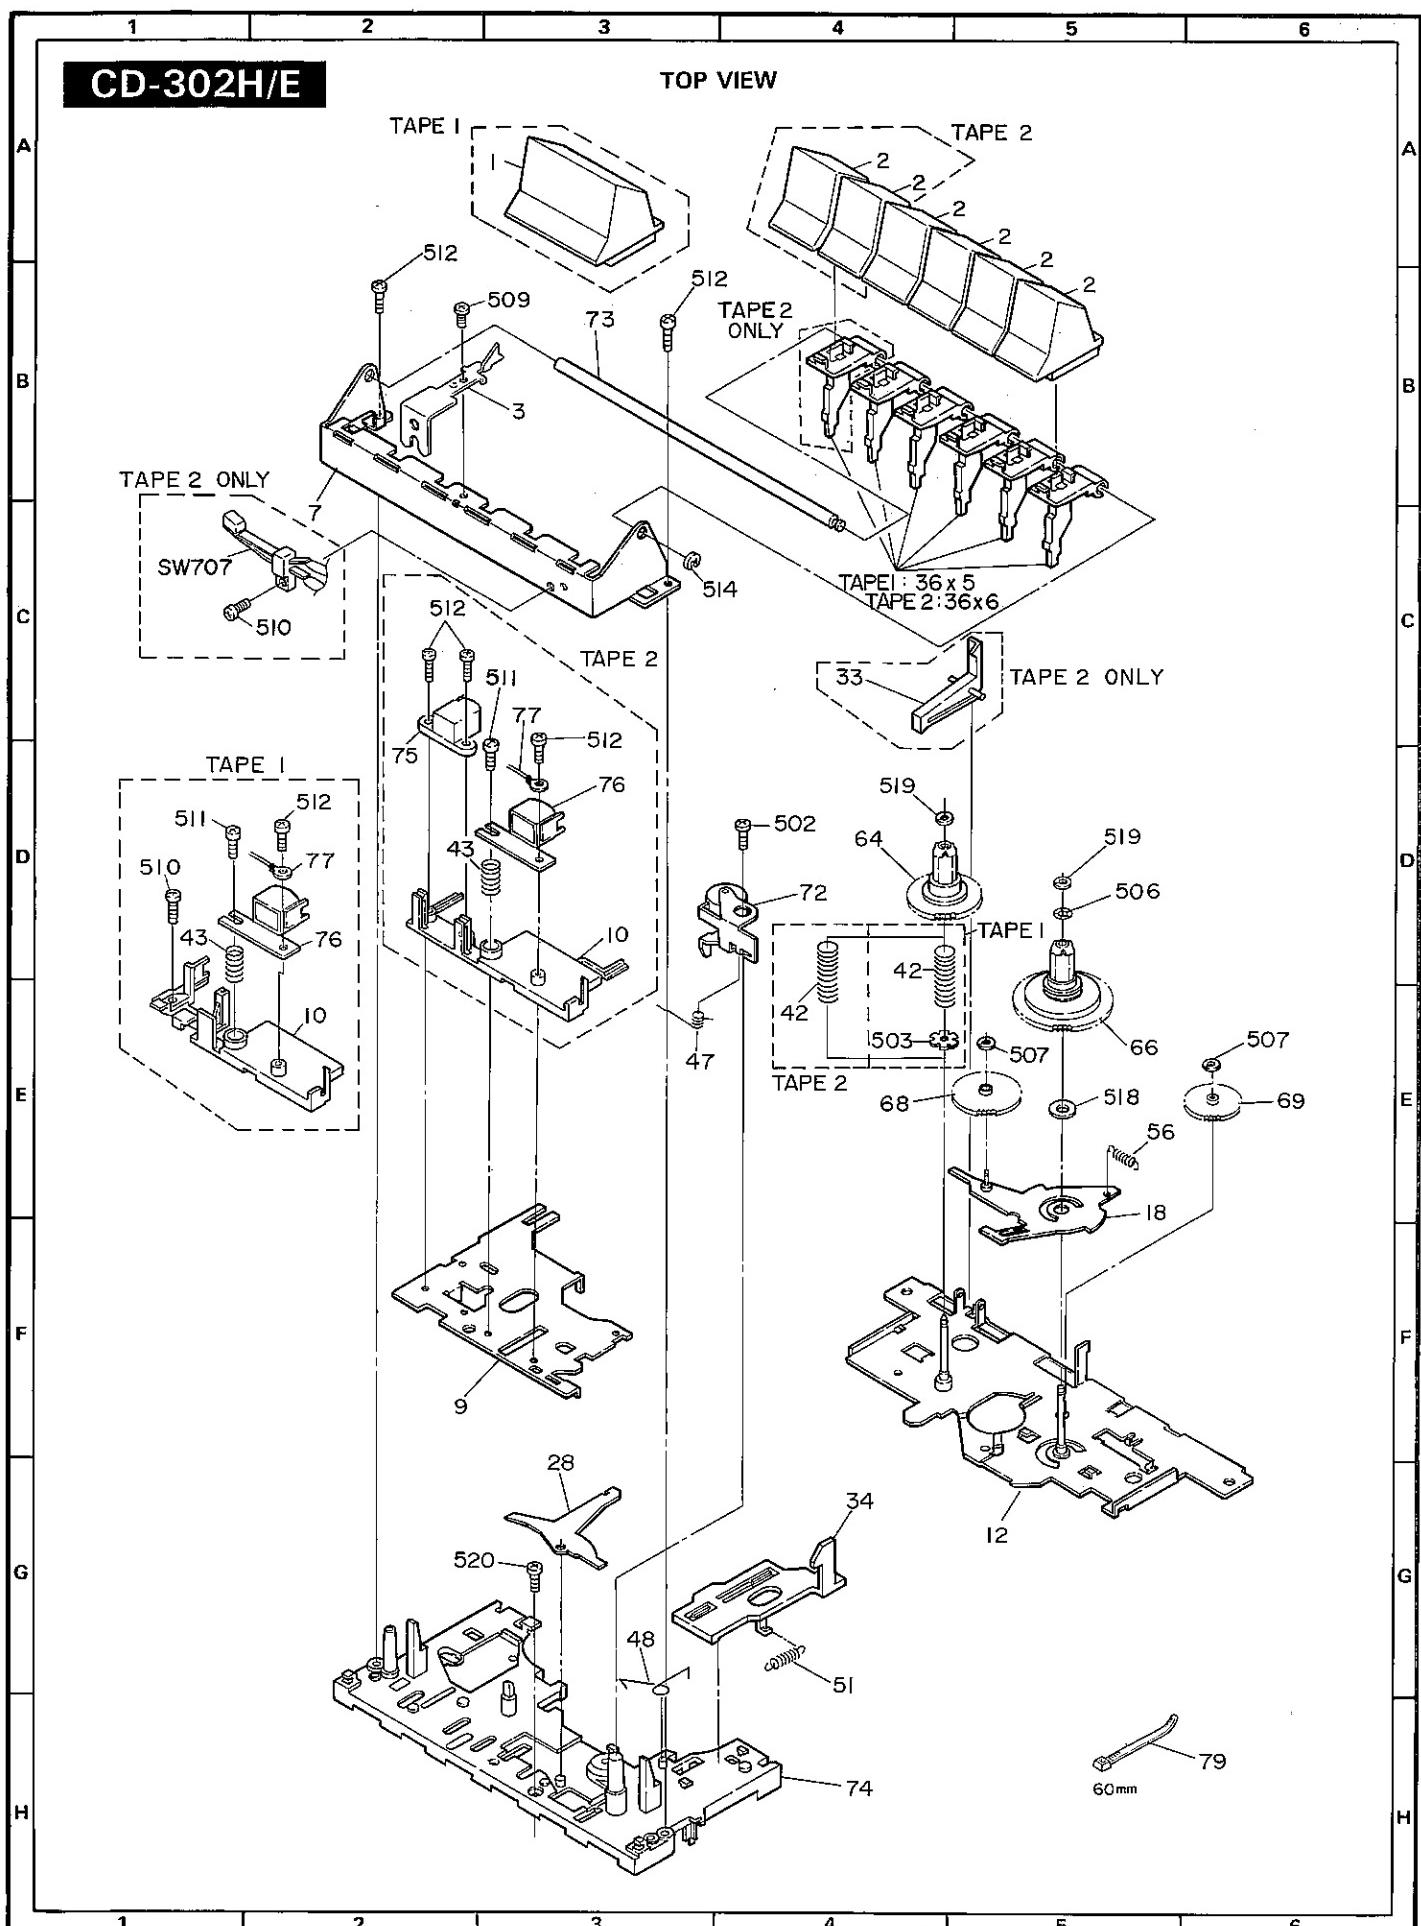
TAPE MECHANISM EXPLODED VIEW (1/2)
